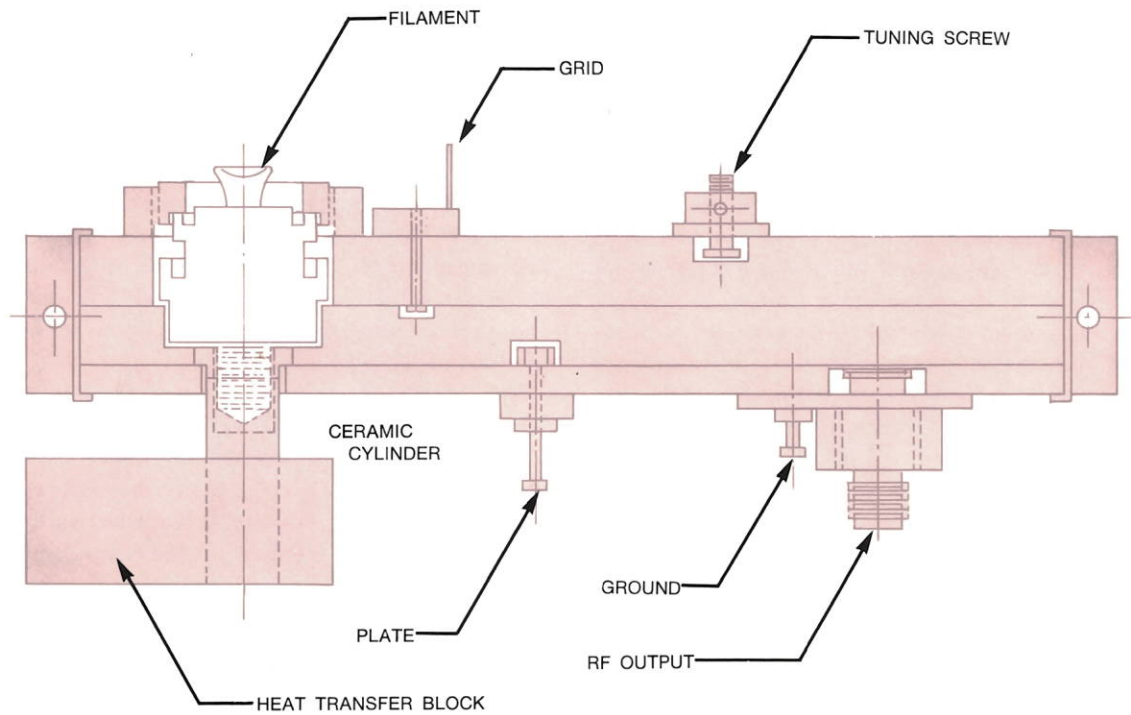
GLJ-3123 Oscillator Cross Section Showing Boron Nitride Heat Removal Cylinder Attached to Heat Transfer Block.
